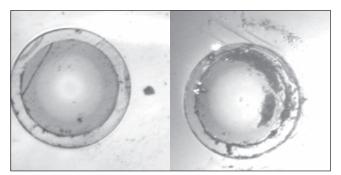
Damaged End Faces (Left: Crack in Cladding, Right: Permanent Dirt)
